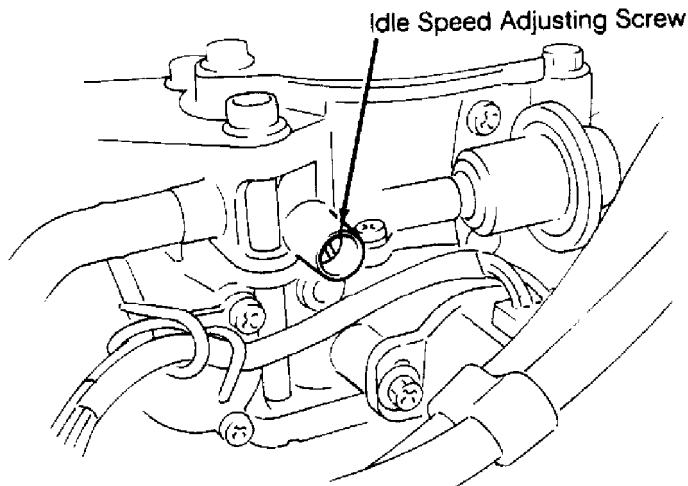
Locating Idle Speed Adjusting Screw (Typical)
